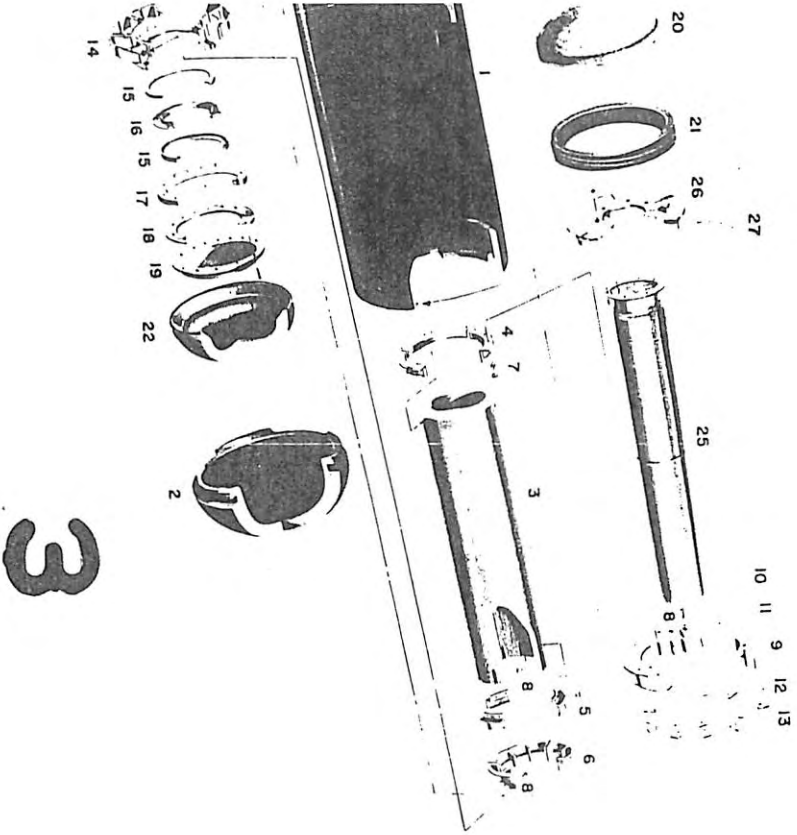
Exploded View of GLFC (with Beryllium Secondary Shield)
